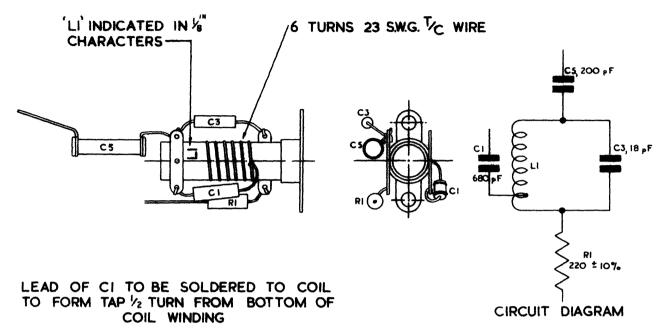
Component detail and assembly of coil formers for L1, L2, L6 and TR1
